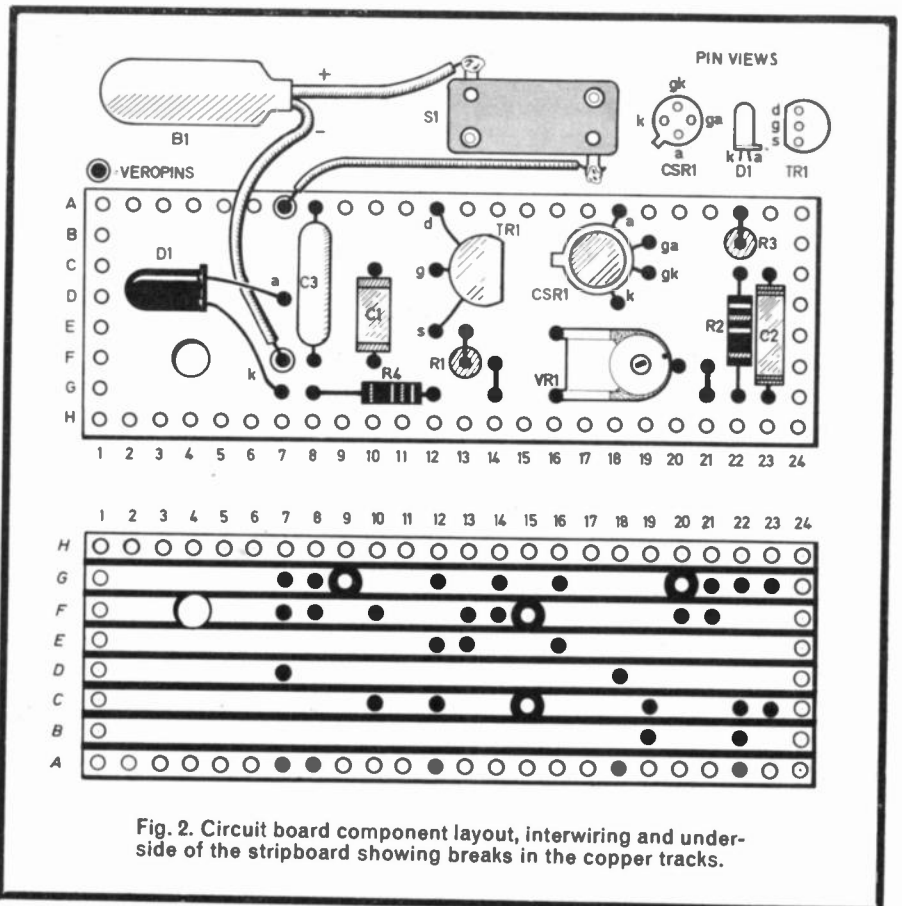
Circuit board component layout, interwiring and underside of the stripboard showing breaks in the copper tracks.
